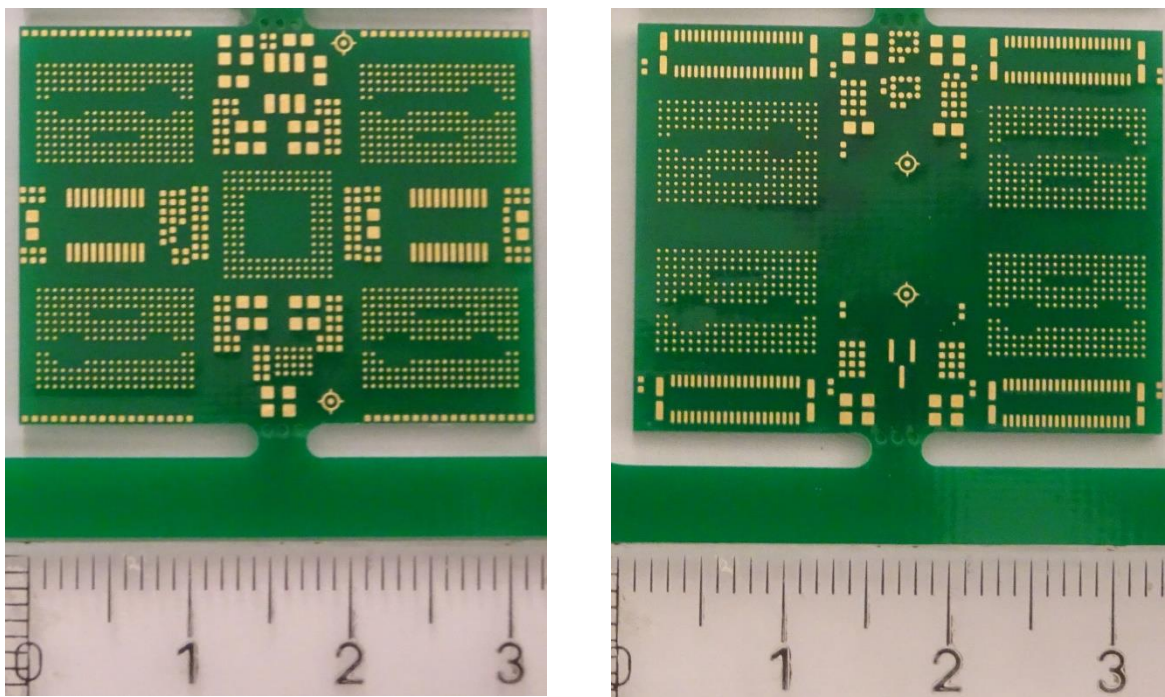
The Multi-Chip-Module printed circuit board, top-side left and bottom side right.
